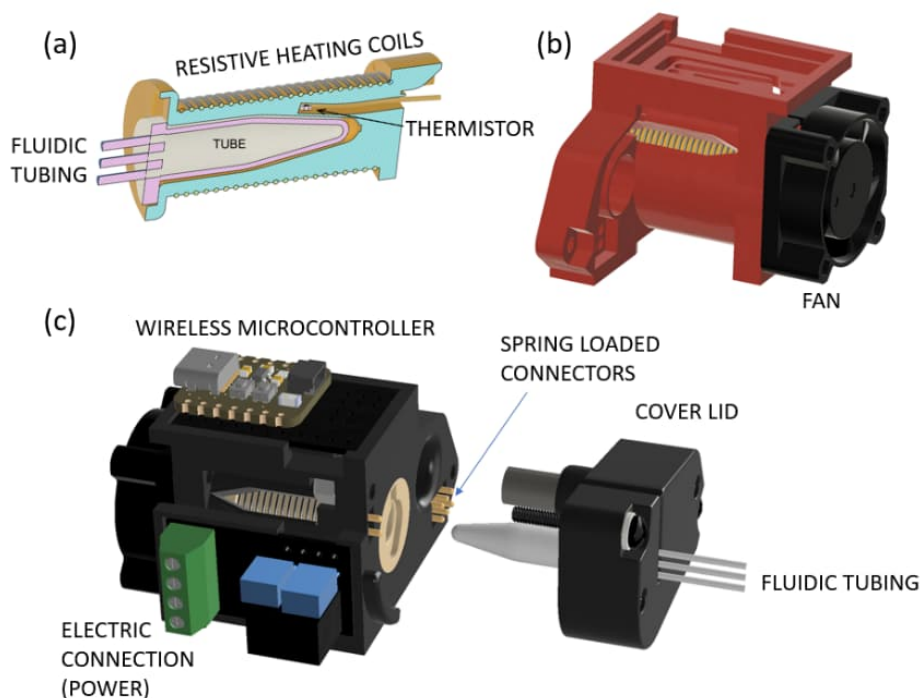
3D drawings of the miniature PCR thermocycler. (a) Axial cross-sectional area along the symmetry axis of the PCR tube highlighting the resistive heating coil, the thermistor for temperature control, and the fluidic tubing. (b) Main body of the thermocycler with the cooling fan. (c) Complete assembly of the thermocycler consisting of the main body accommodating the PCR tube, the wireless microcontroller, the electric connector and the cover lid with a secondary resistive heating coil for preventing evaporation and a mechanical pinch valve to simultaneously close the fluidic tubing during PCR cycling.
